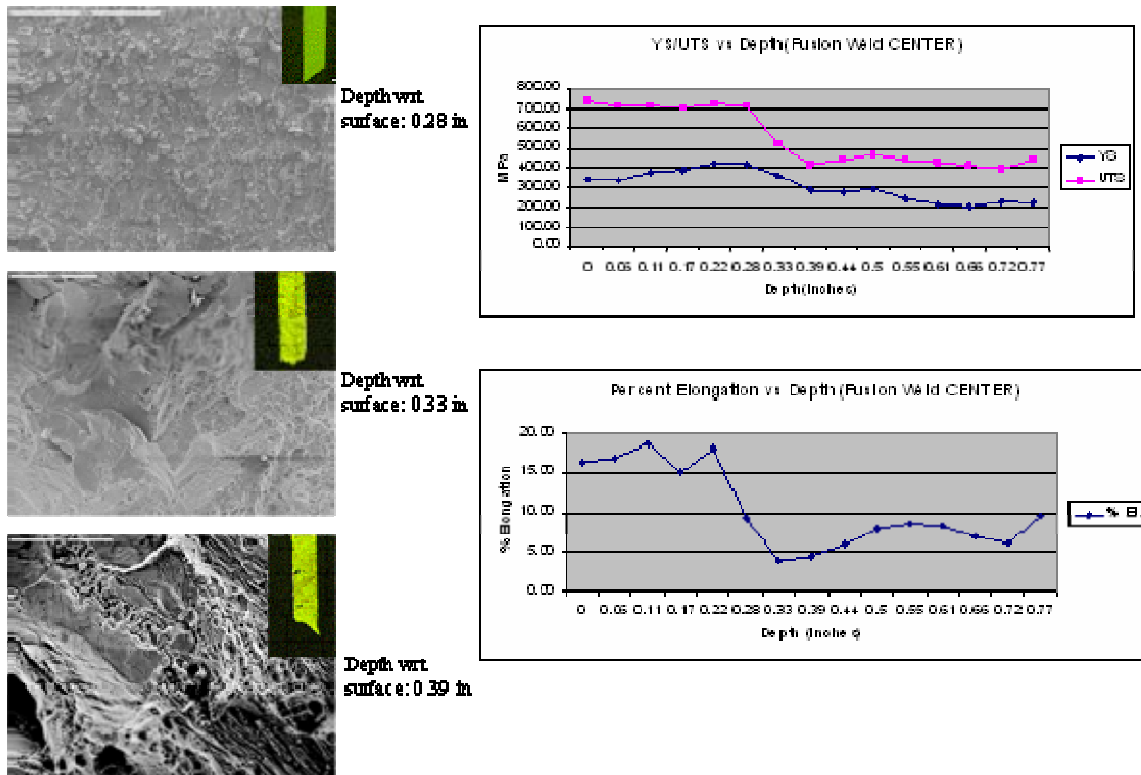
B.4. Illustrates Fusion Weld Fractography and Mechanical Testing Data.
